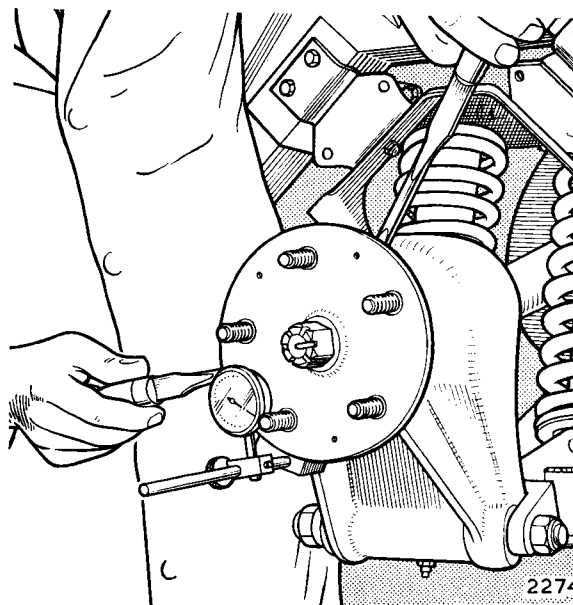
Checking the hub bearing end-float when in position (Churchill Tool No. J.13)
